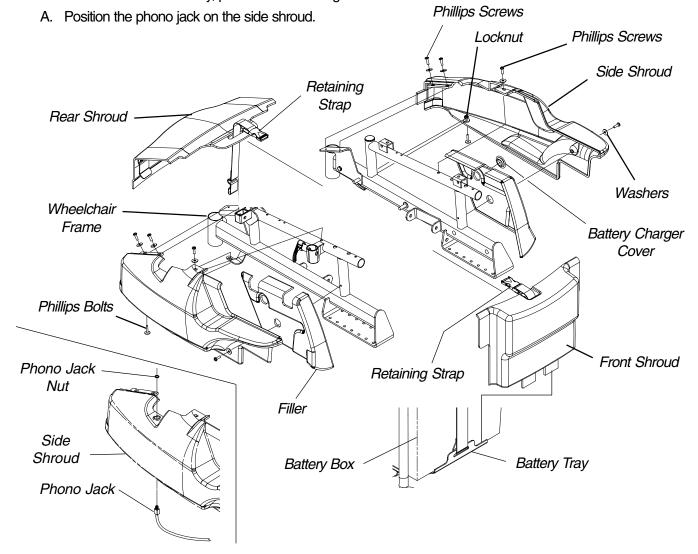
REMOVING/INSTALLING SHROUDS - FWD WHEELCHAIRS
